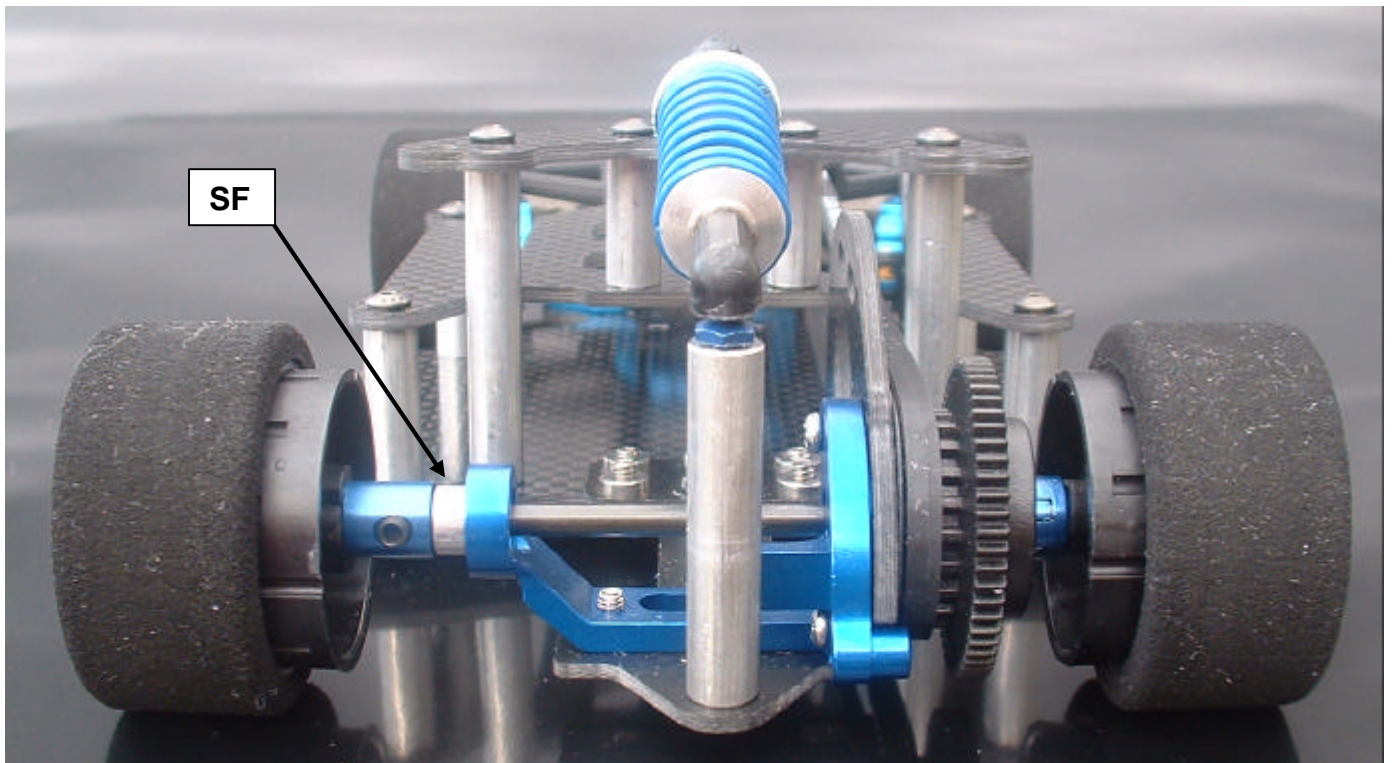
Rear axle showing 3mm spacer [SF] and total wheel offset with unmodified wheel drum.
